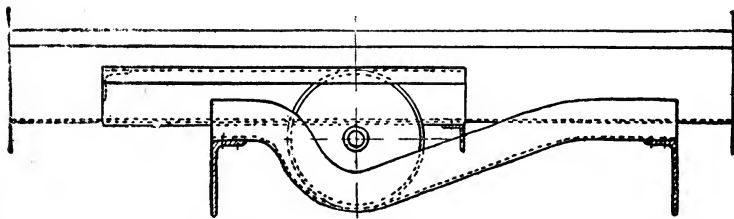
Side View of Trough and Rollers of Shaker Conveyor
